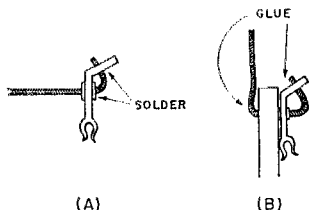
To add or replace a rotary switch contact, (A) solder a wire lead to the new contact, and (B) glue it to the switch wafer.
